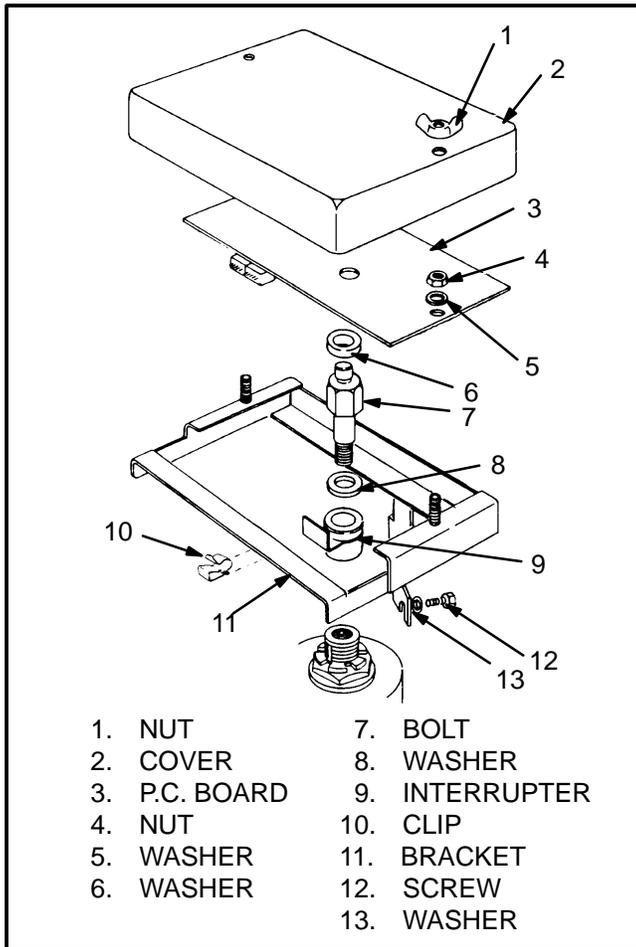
STEERING ANGLE CONTROL BOARD MOUNTING
